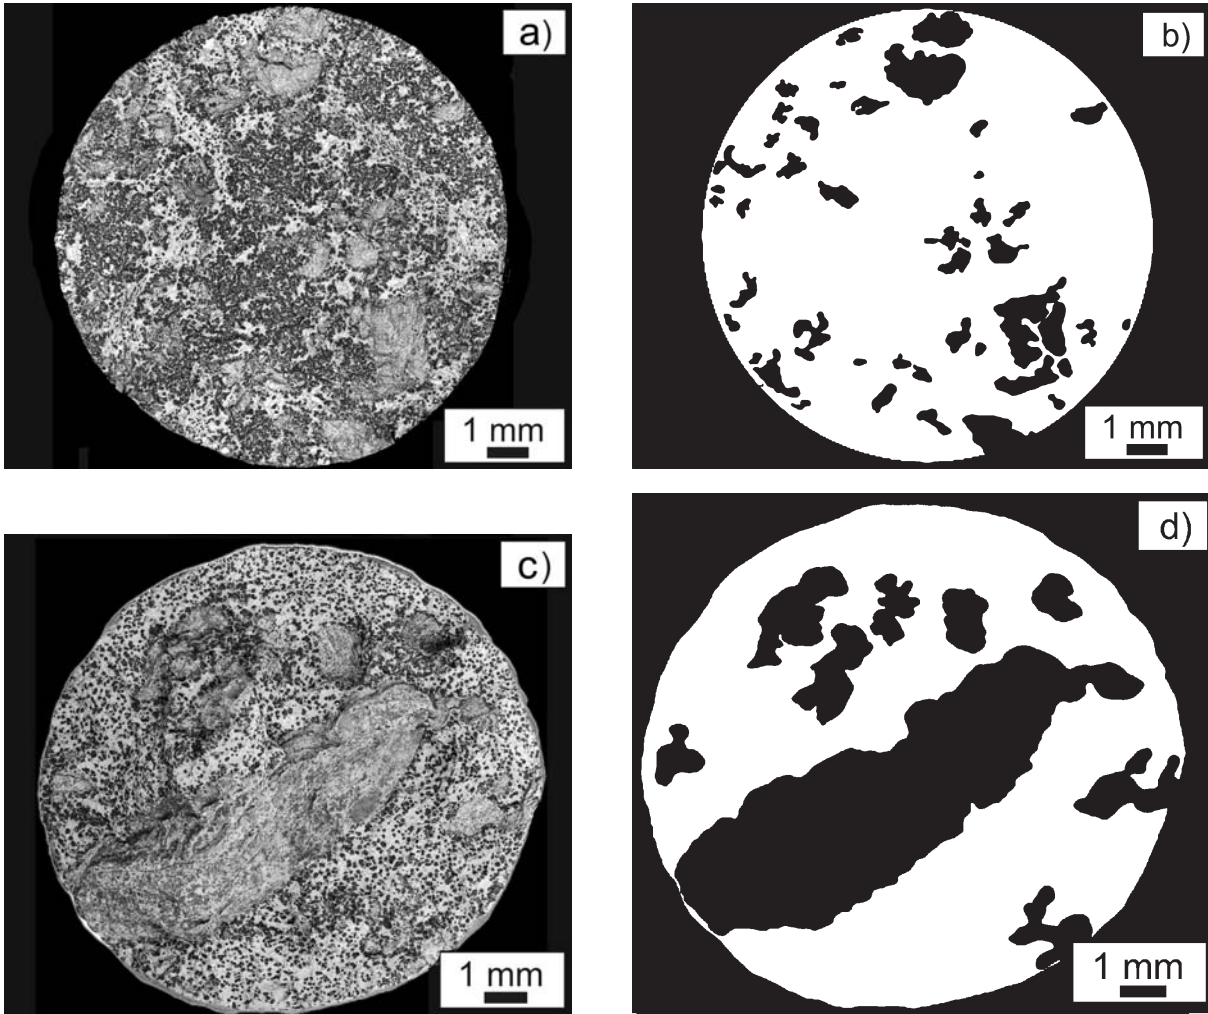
Fracture surfaces with casting defects for two inserts (I24T6: specimen diameter 14 mm,  $A = 2.3\%$ ) and (I24LS3: specimen diameter = 9 mm,  $A = 1.4\%$ ): a) SEI-macrograph of I24T6, b) processed picture for defect sizing of I24T6, c) SEI-macrograph of I24LS3, d) processed picture for sizing defects of I24LS3.
